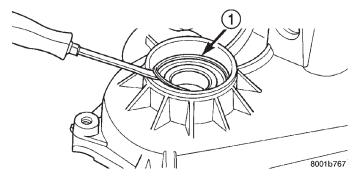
Installing Output Shaft Front Bearing Retaining Ring
